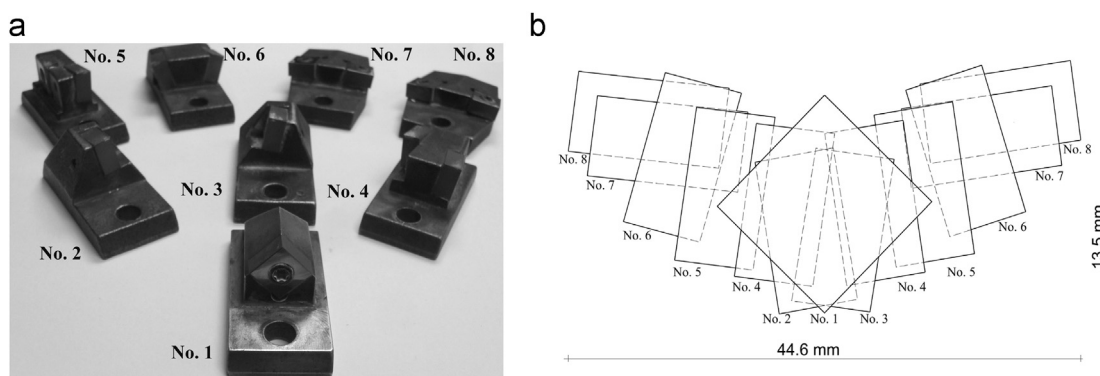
(a) Tool holders and cutting tools of the cutting sequence, (b) cutting tools lacing design.
